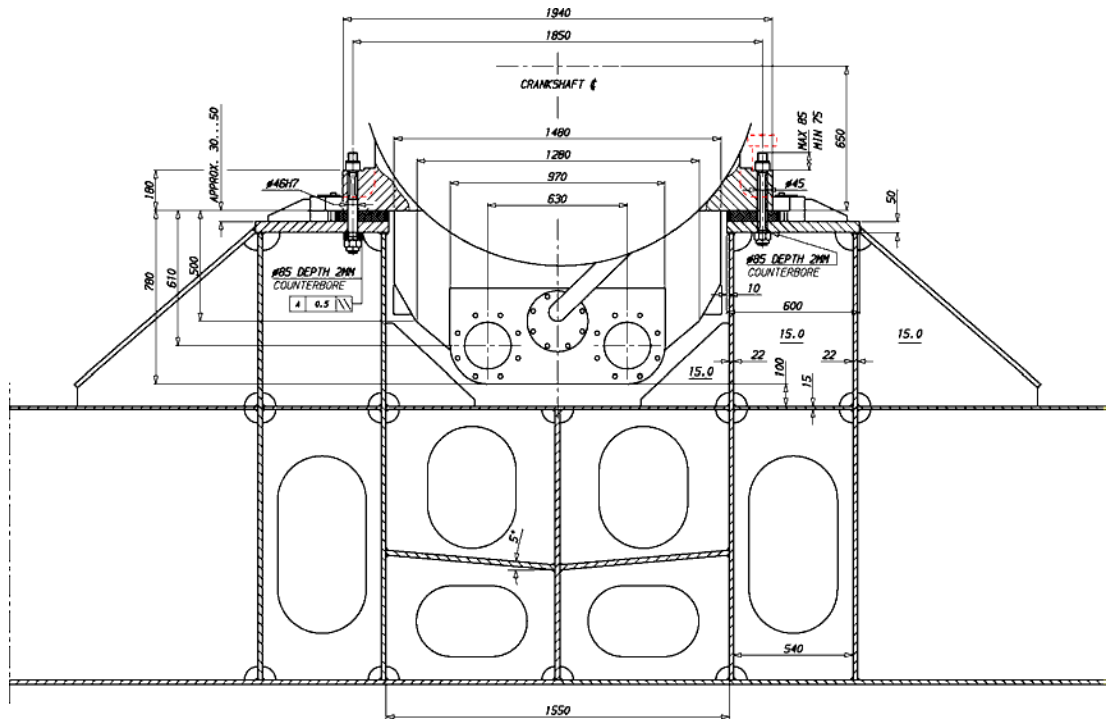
Seating and fastening, rigidly mounted in-line engine on resin chocks (DAAE012078a)
